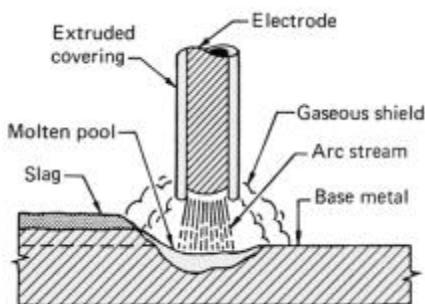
This shows how the coating on a coated (stick) electrode provides a gaseous shield around the arc and a slag covering on the hot weld deposit.
